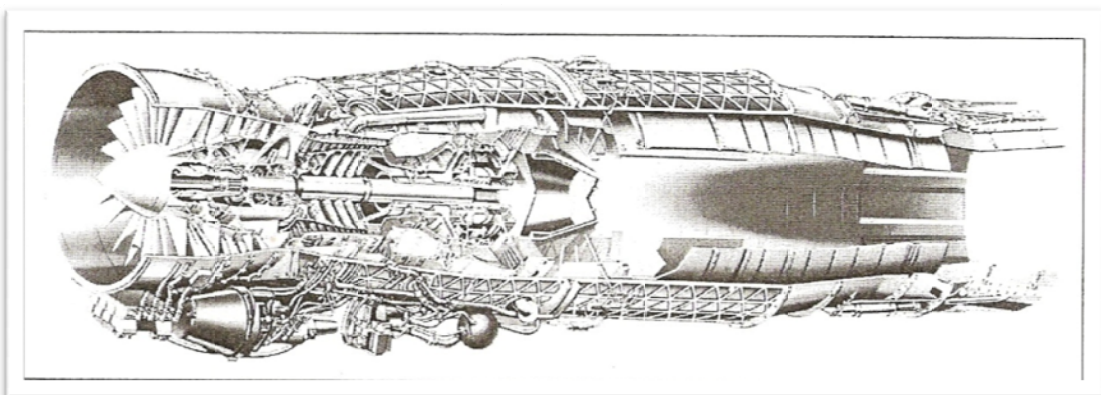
Cutaway drawing of EJ-200 ^[12]
